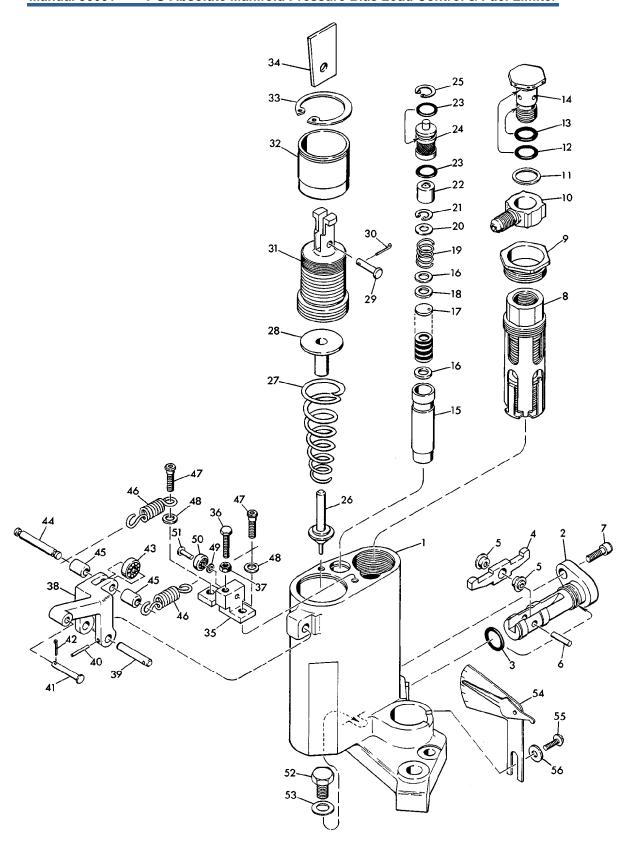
Exploded View, Absolute Manifold Pressure Bias Load Control and Fuel Limiter (Double Barrel Model)
